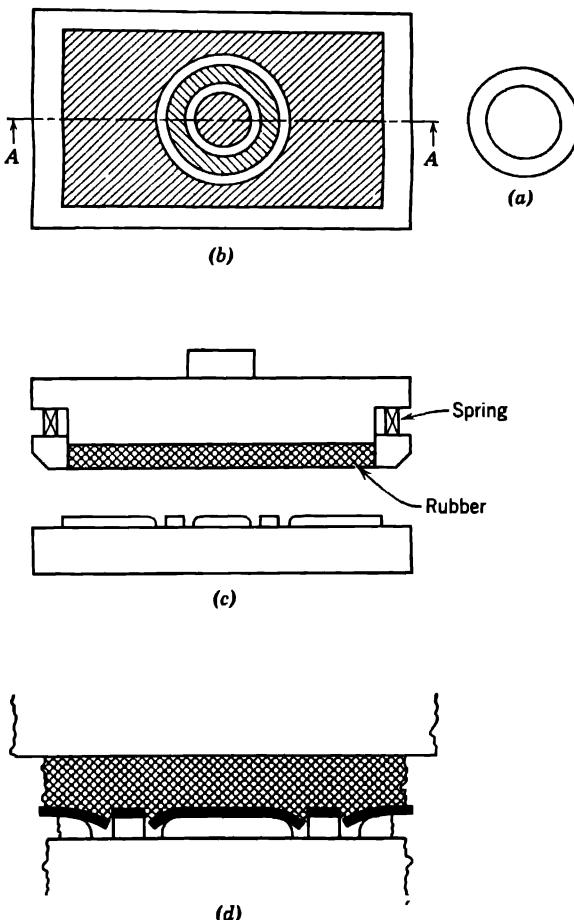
Rubber die used for piercing and blanking. (a) Part to be produced. (b) Plan view of die. (c) Section A-A of die in view (b). (d) Enlarged section A-A with die in closed position.
